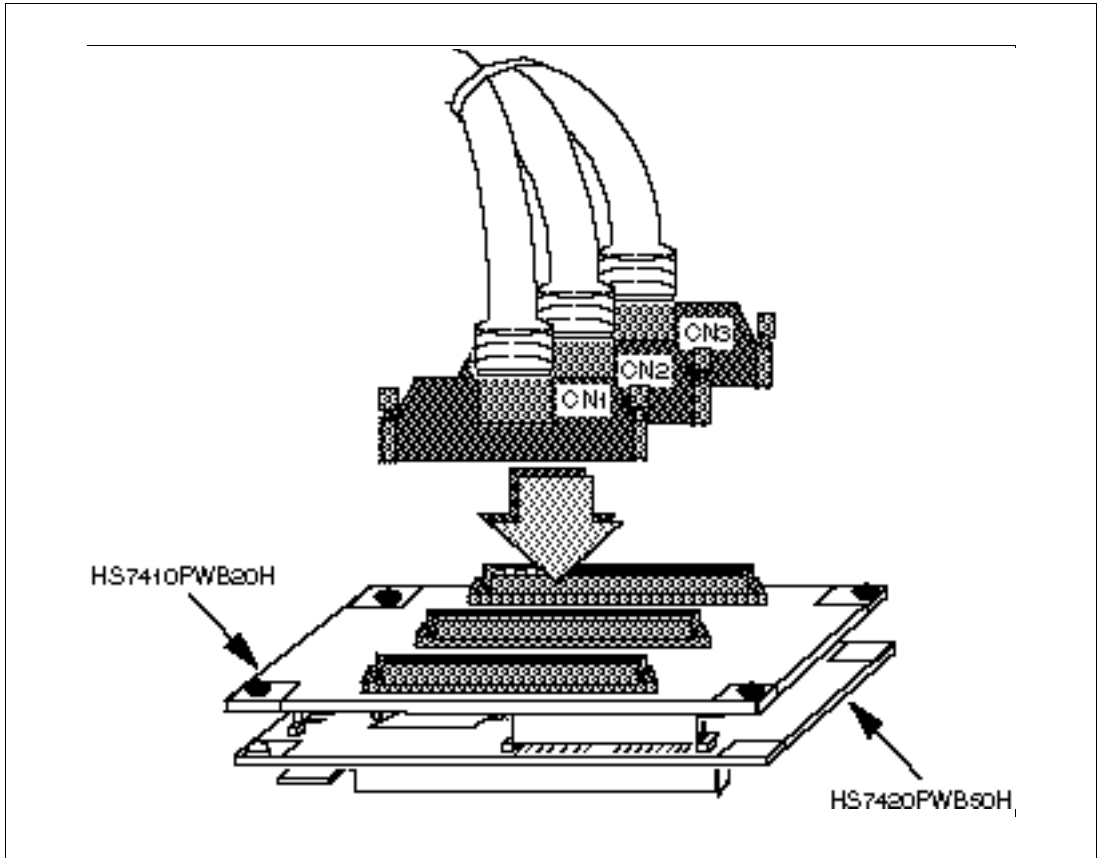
Connecting Trace Cables to the EV-Chip Board
